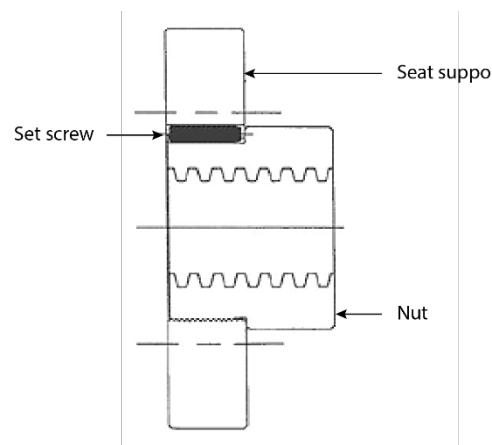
Secured externally threaded bolts. The set screws prevent the nuts from unscrewing. Image originally from Roton Products (2019).
